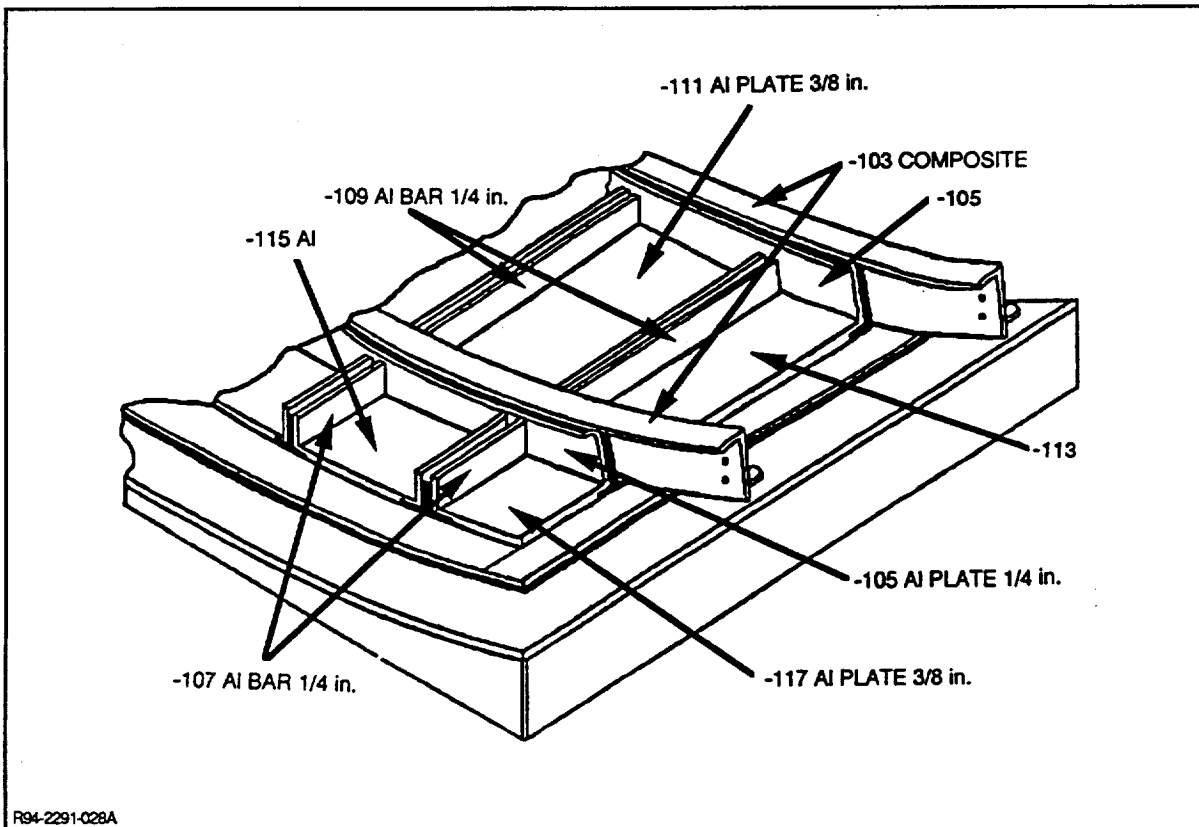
Sketch of Cure Fixture for Woven AS4/3501-6 Gr/Ep Lower Fuselage Panel
